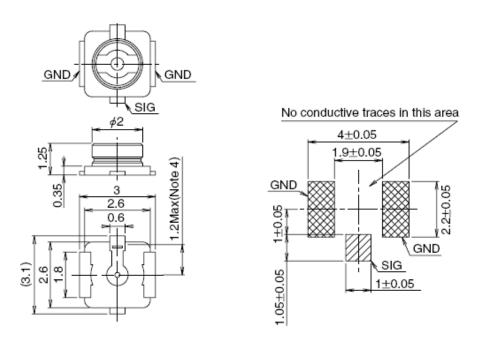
Dimensions of the U.FL-R-SMT Connector (Unit: mm)
